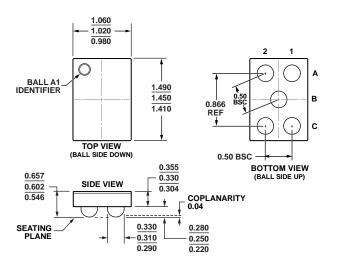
5-Ball Wafer Level Chip Scale Package [WLCSP] (CB-5-3) Dimensions shown in millimeters
